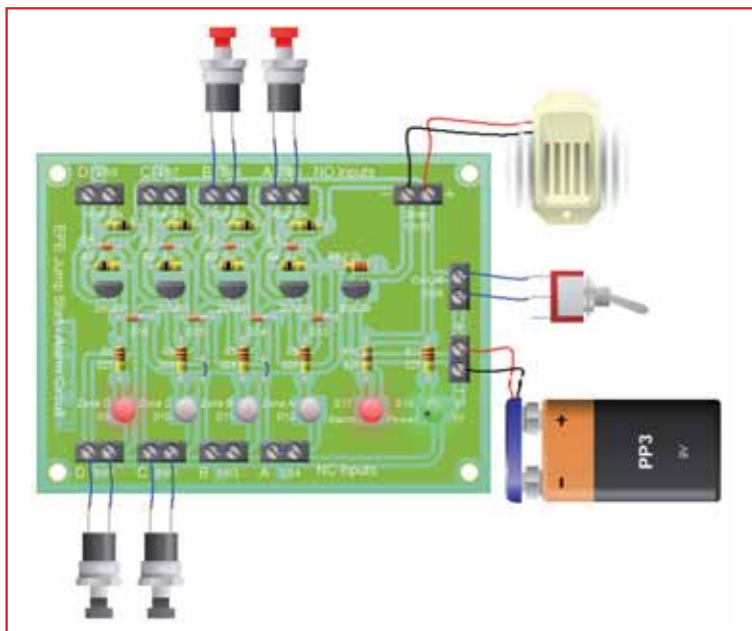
The printed circuit board (PCB), component layout for the Versatile Theft Alarm being 'tested' virtually in Circuit Wizard
